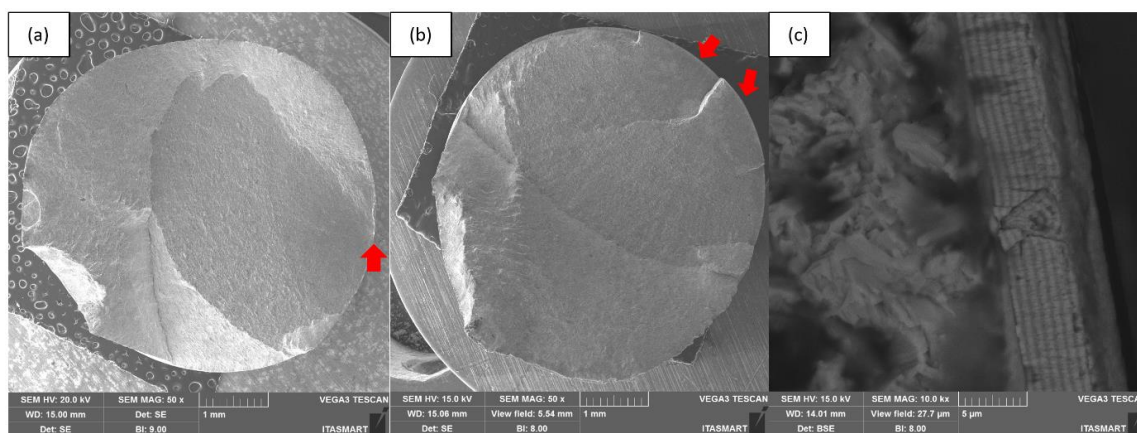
SEM of fracture surfaces tested at 1000 MPa. Details of (a) uncoated, (b) coated and (c) coating damage.
